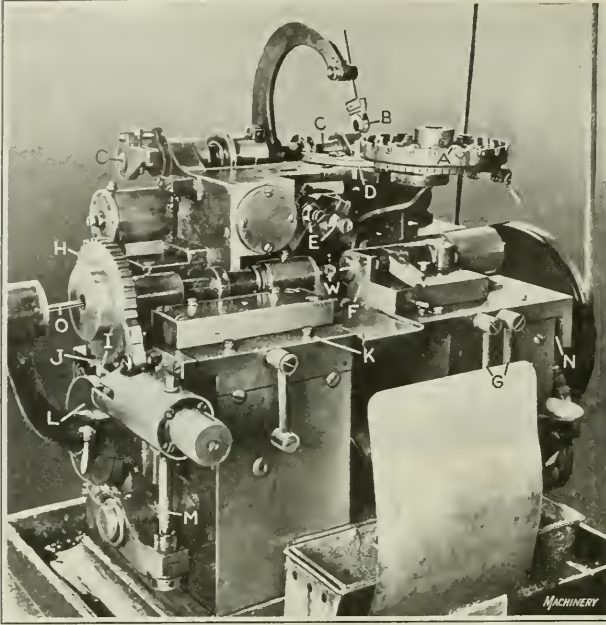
Automatic Machine in which the Teeth are cut in Steel Wheels or Pinions
